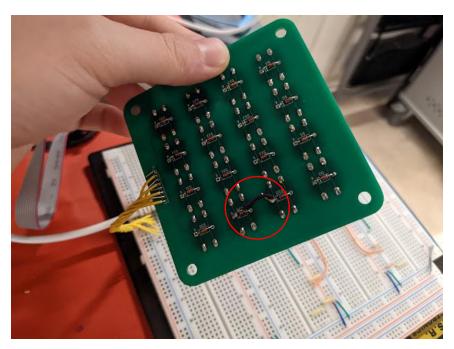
Backside of PCB. Circled in red is the fix to the manufacture error.
